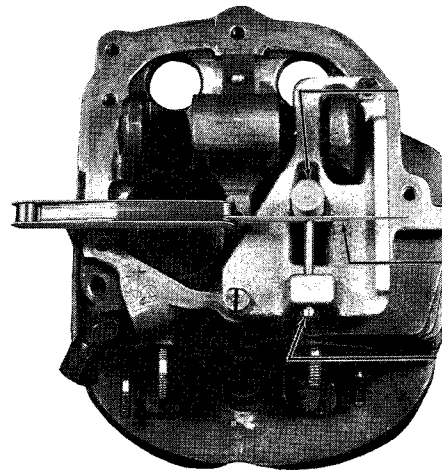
Feeler Gage in Position Between Set-Screw and Gage Adapter
